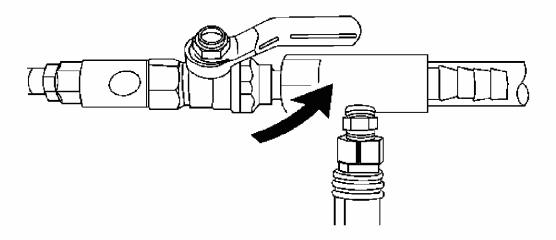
Identifying Valve & Venturi Assembly Courtesy of GENERAL MOTORS CORP.
